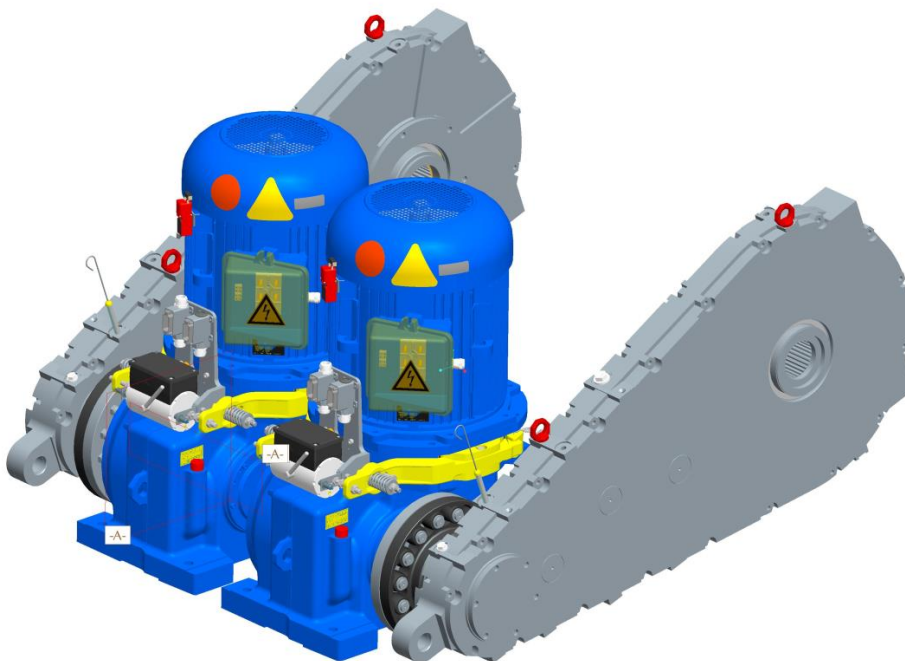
EC 2-25 Dulex machine, consisting of 2x Drive unit, 2x Intermediate coupling. und 2x Intermediate gear
